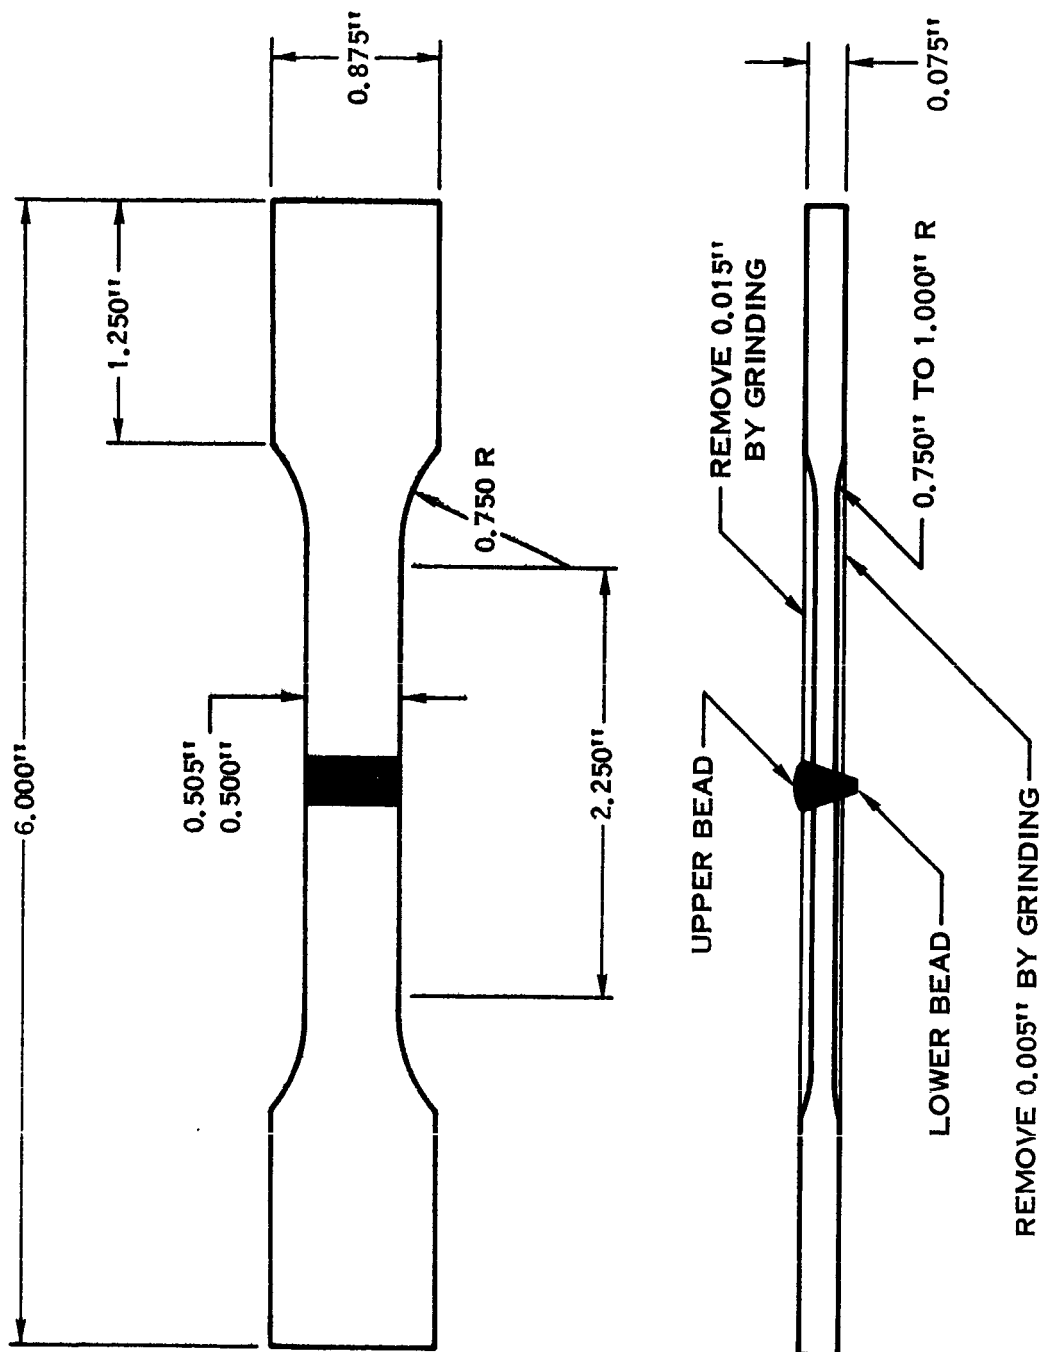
TENSILE TEST SPECIMEN (AISI 304)
